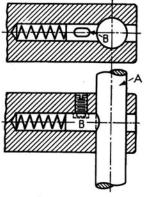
The end of the plunger B bearing against the hand lever A is concaved and prevented from turning by the dog-point setscrew engaging the splined slot. Friction is the only thing that holds the adjustable hand lever A in position.
